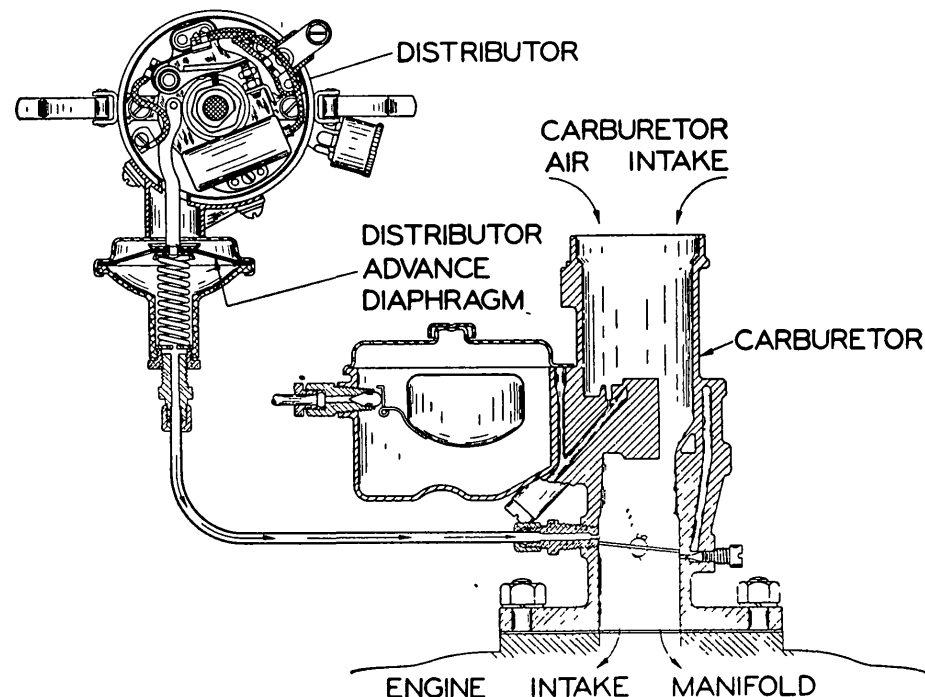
Aut-Lite vacuum advance mechanism of the type which is mounted on the side of the distributor. Breaker plate is supported on a ball bearing, and the breaker plate advances in the housing as vacuum conditions change
